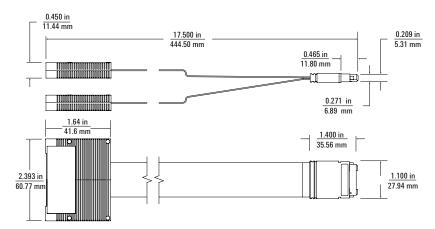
E5346A, E5351A, E5339A Mictor probes mechanical dimensions
